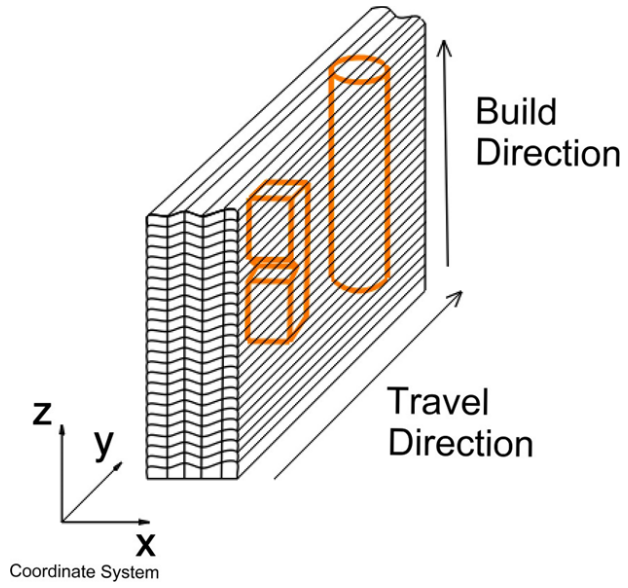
Material Manufacturing Coordinate System and Material Test Specimen Orientation
